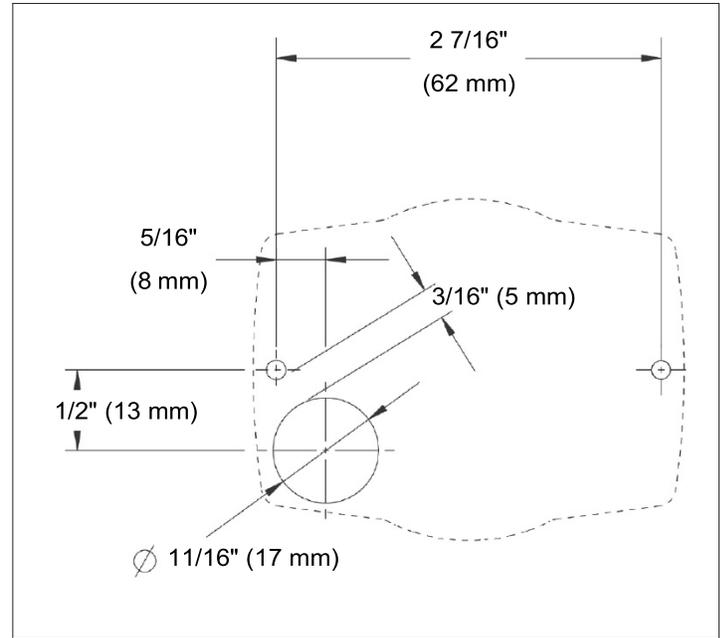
SmarTemp Drilling Dimensions (Not to scale)
